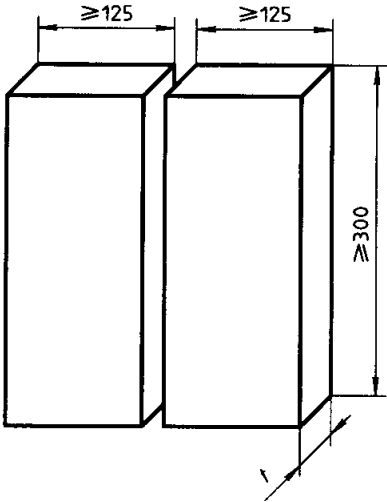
Dimensions of test piece for a butt weld in plate
